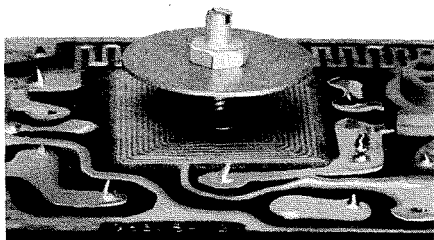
Detail of the i-f coil tuning washer on the picture i-f printed board
